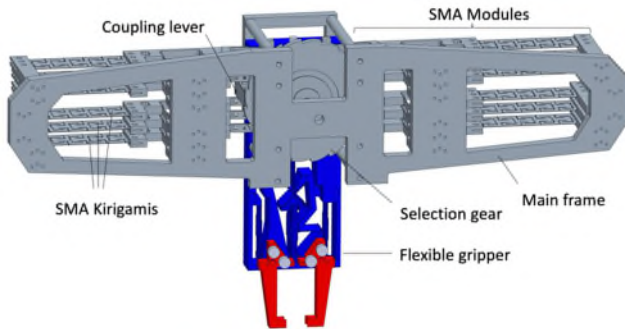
CAD view of a metal 12-SMA prototype mounted on a gripper.
